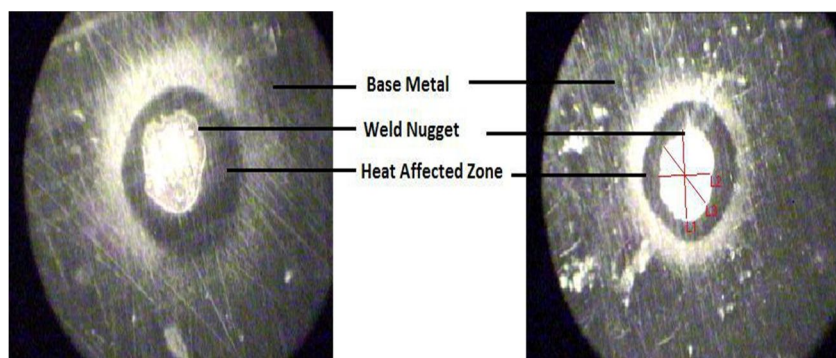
Measurement of various zones of weld nugget (10x optical zoom)
